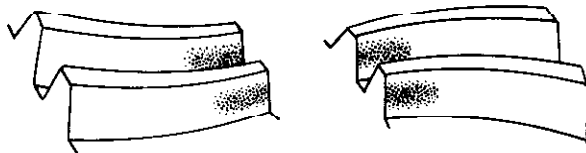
Toe Contact—To Correct Move Gear Away From Pinion
